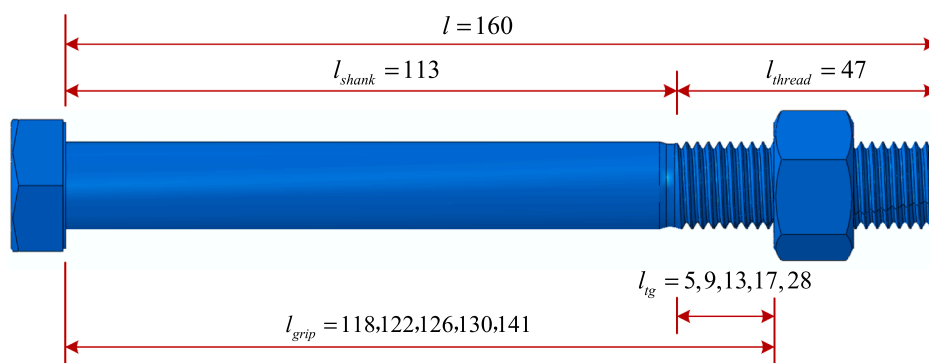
Dimensions of partially threaded bolt assemblies (according to [7]).
